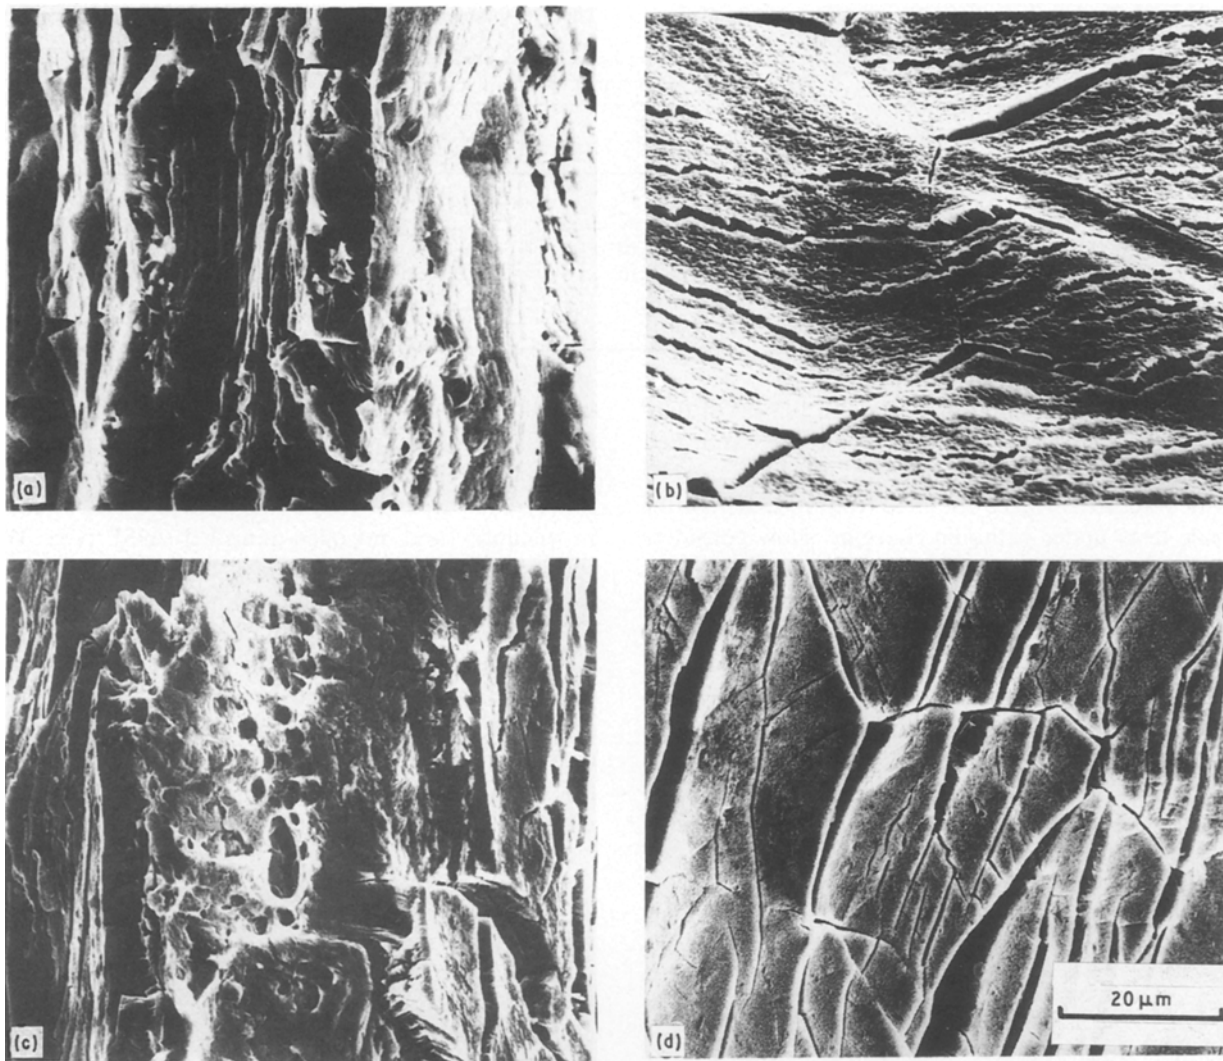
Micrographs of (a), (c) the fracture surface, and (b), (d) the side of the fracture surface of AISI type 316 stainless steel tensile tested while undergoing cathodic charging: (a), (b) annealed; (c), (d) nitrogenized.
